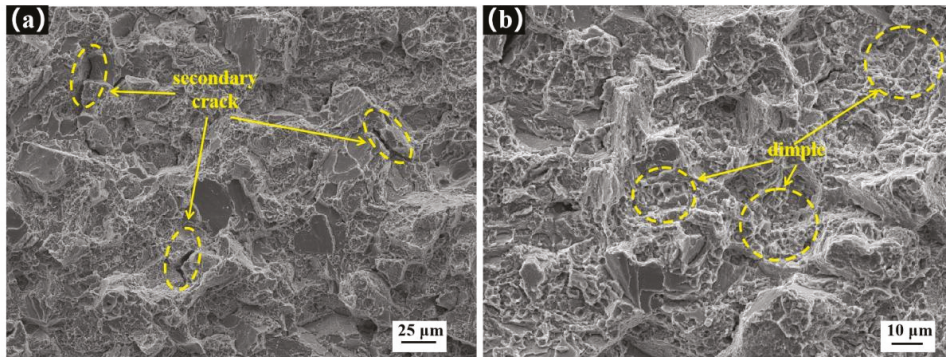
Tensile fracture morphology: (a) secondary cracks, (b) equiaxed dimples.
